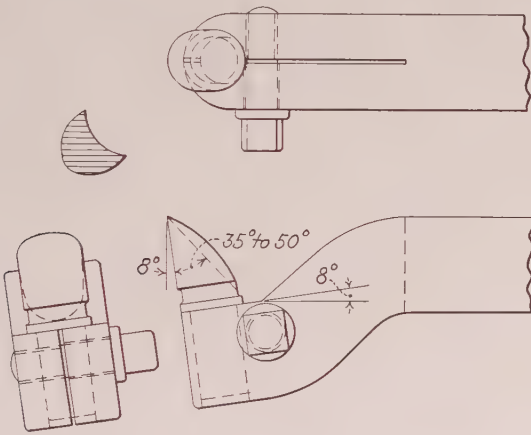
LATHE TOOL RECOMMENDED FOR USE WITH ALUMINUM.
